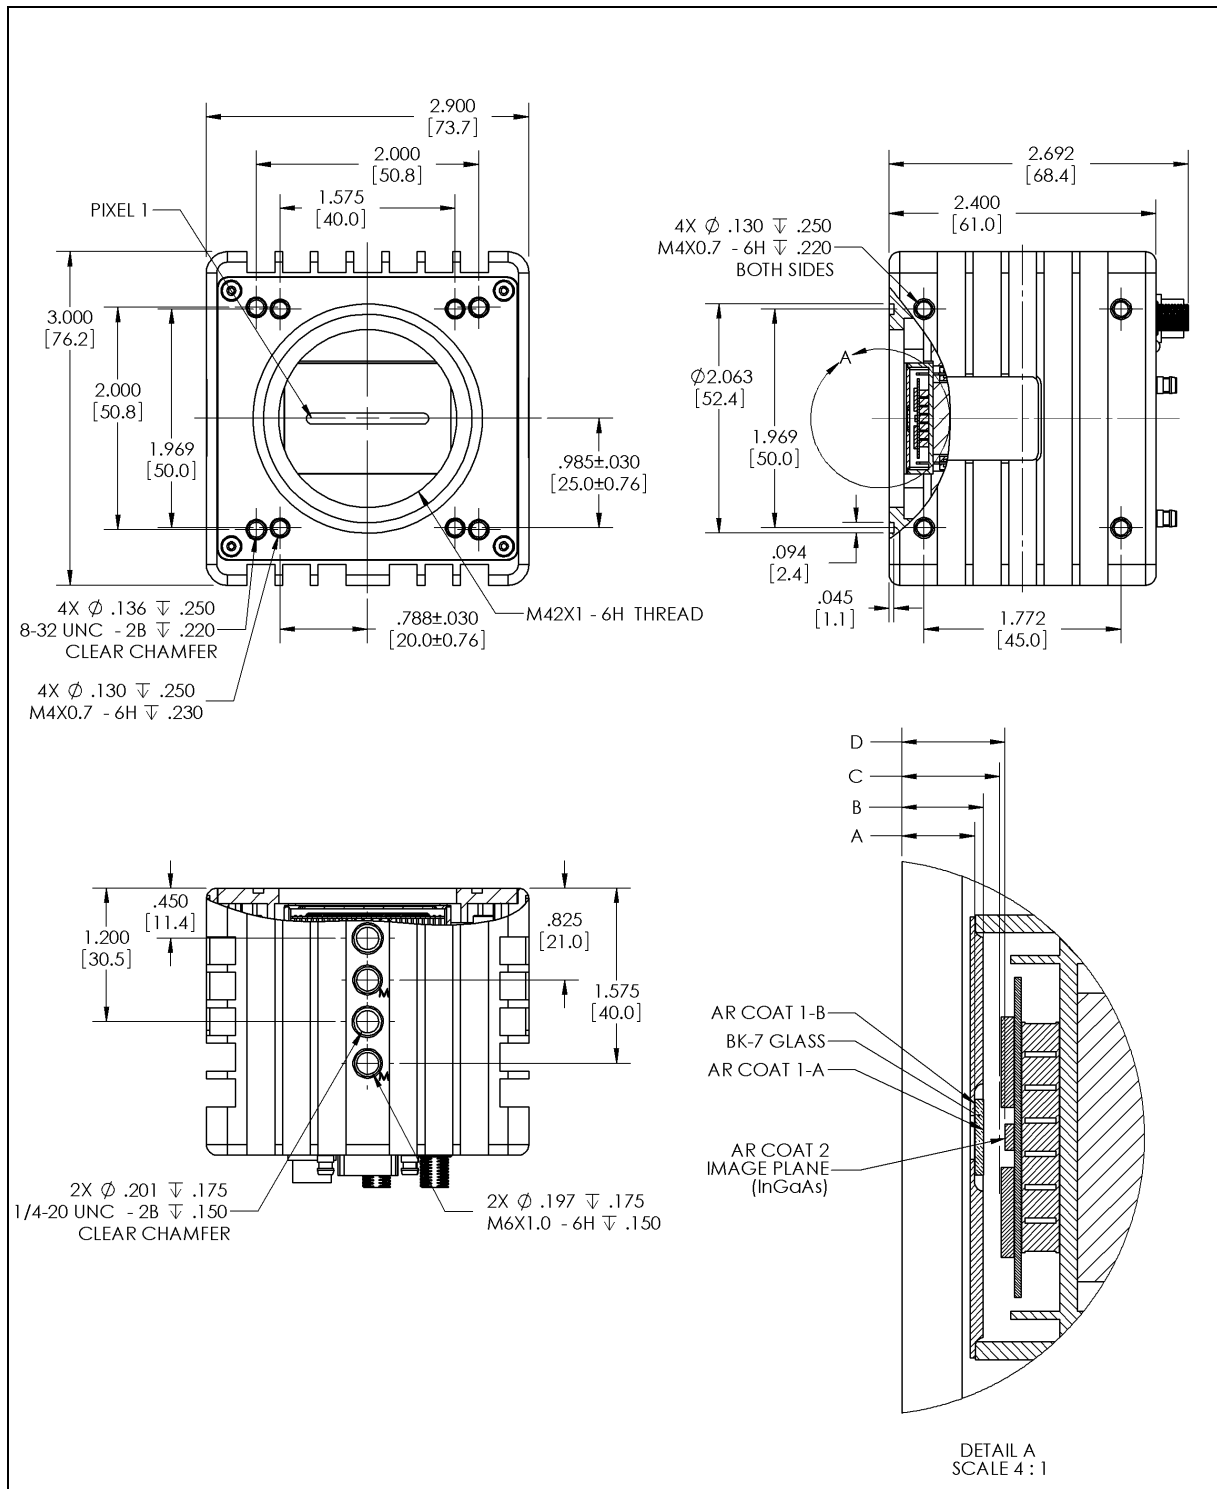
Mechanical drawing of LDH2/LDM cameras including optical path stack-up
